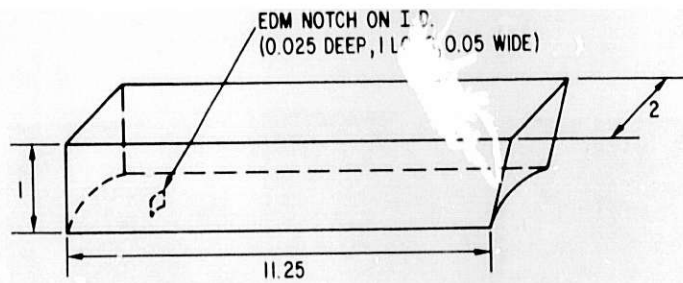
Schematic of Specimen Cut from Pipe Sample of Fig. 9. The inner surface has been left intact, while the outer surface has been machined flat. Dimensions in cm.
